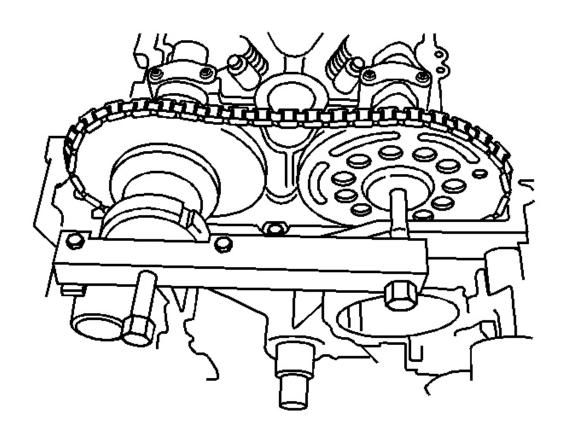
View Of J 44222 Installed Onto Cylinder Head Courtesy of GENERAL MOTORS CORP.
